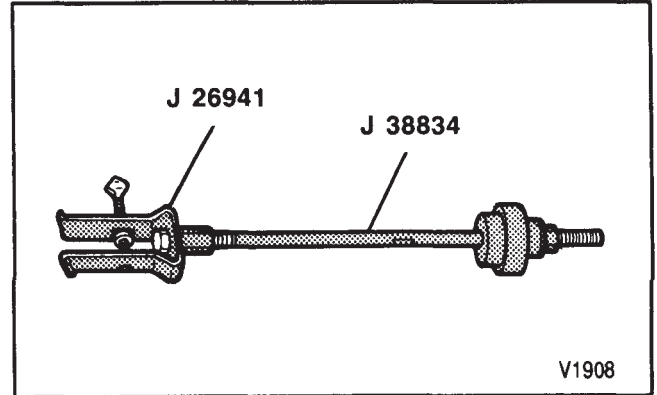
J 38834 Positioned to Remove Balance Shaft Rear Bearing
